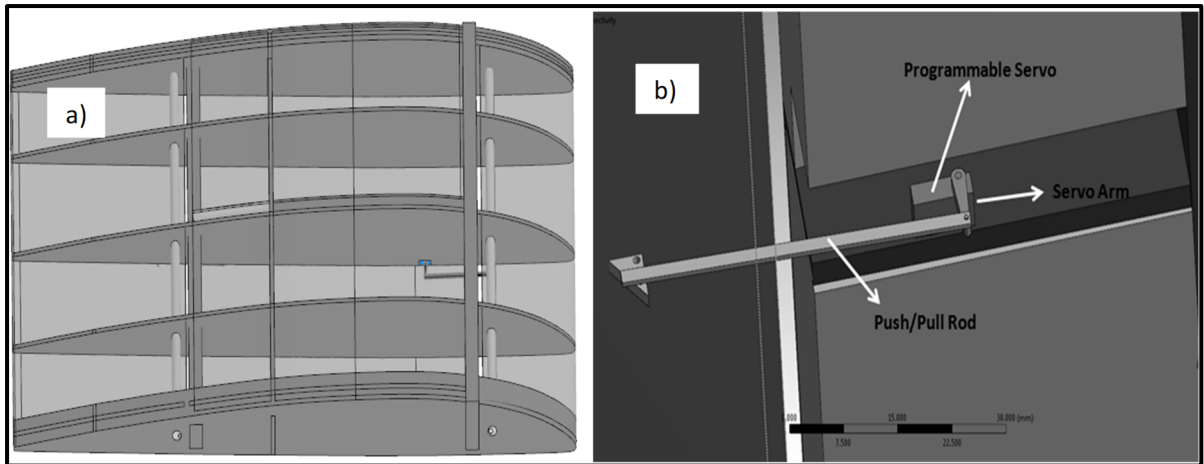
17 a) Top view of the leading edge adaptive wing prototype; b) actuator design is composed of a servo motor and a push/pull rod
